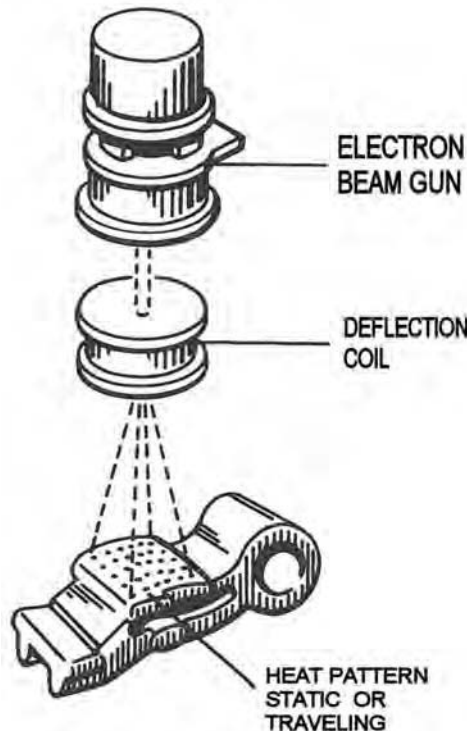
Sketch of gun/coil and heat treat pattern on rocker arm assembly. Courtesy of Sciaky, Inc.
